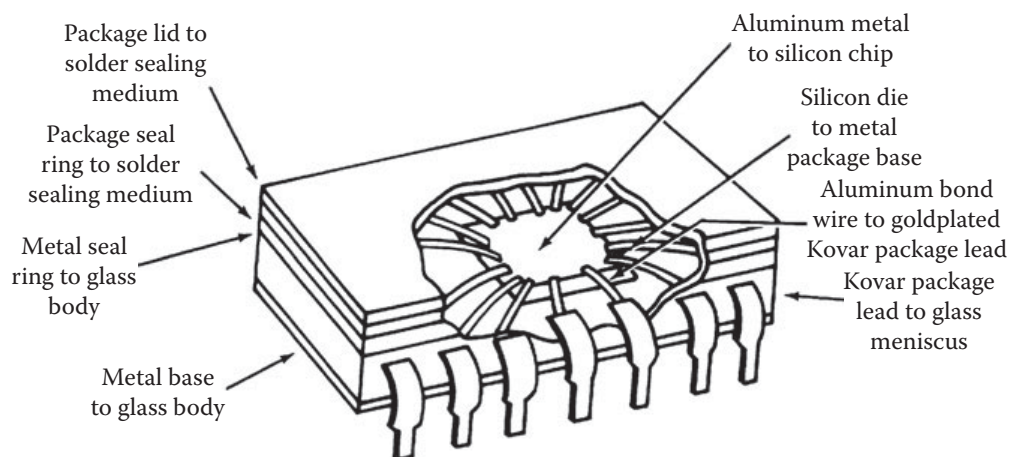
Cutaway view of a DIP integrated circuit package showing the internal-to-external interface. (After [1].)
